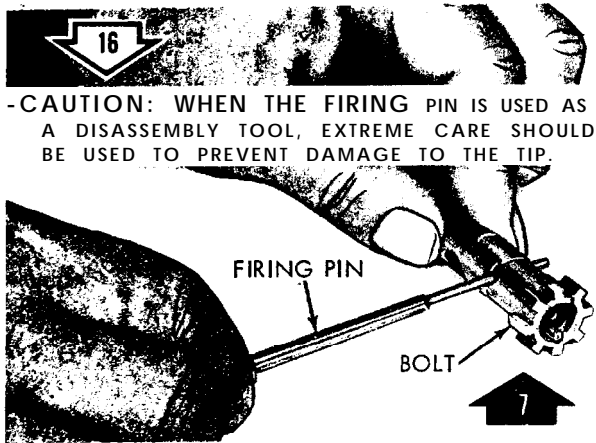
Disassembly/assembly of rifle (3 of 5)
